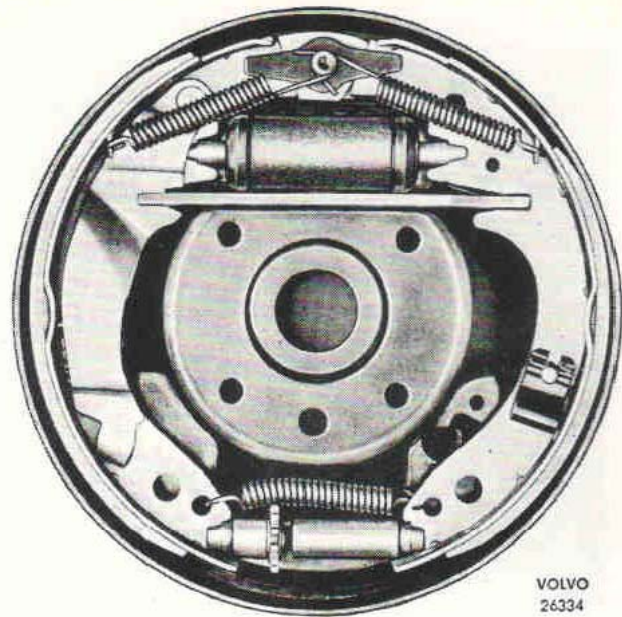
Wheel brake unit, late production, right-hand rear wheel.
